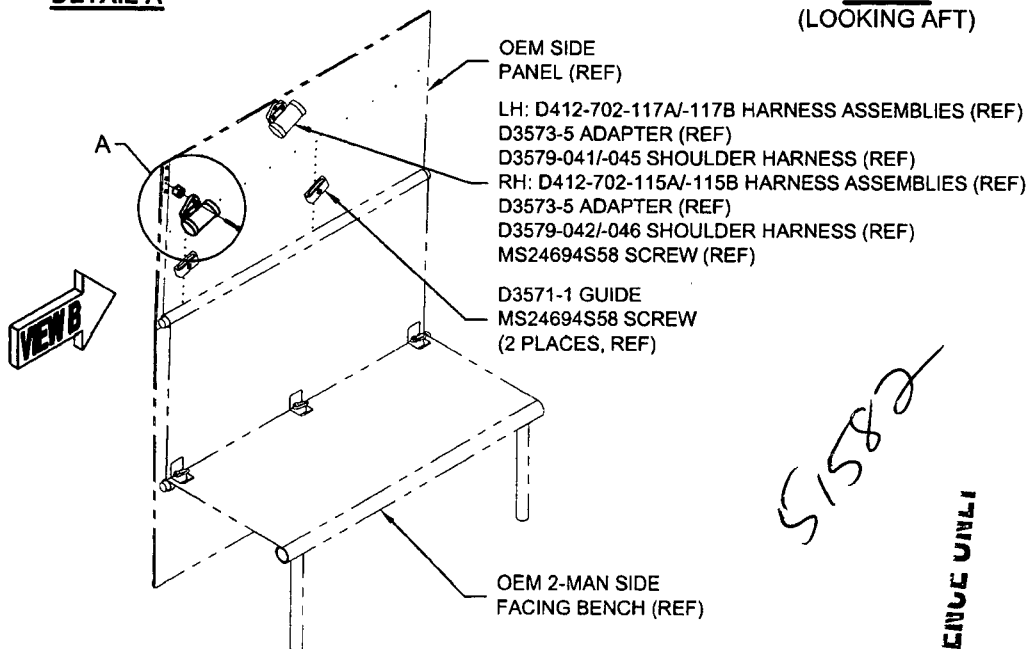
INSTALLATION OF HARNESS ASSEMBLY
